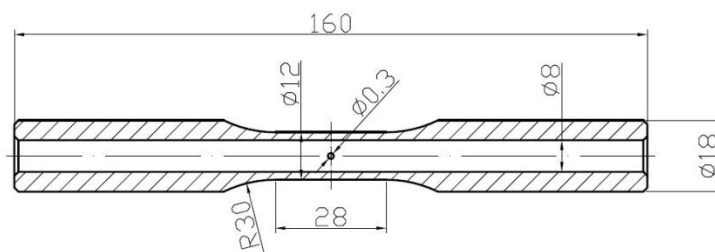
Hollow specimen with a small hole drilled into the gauge length wall.
